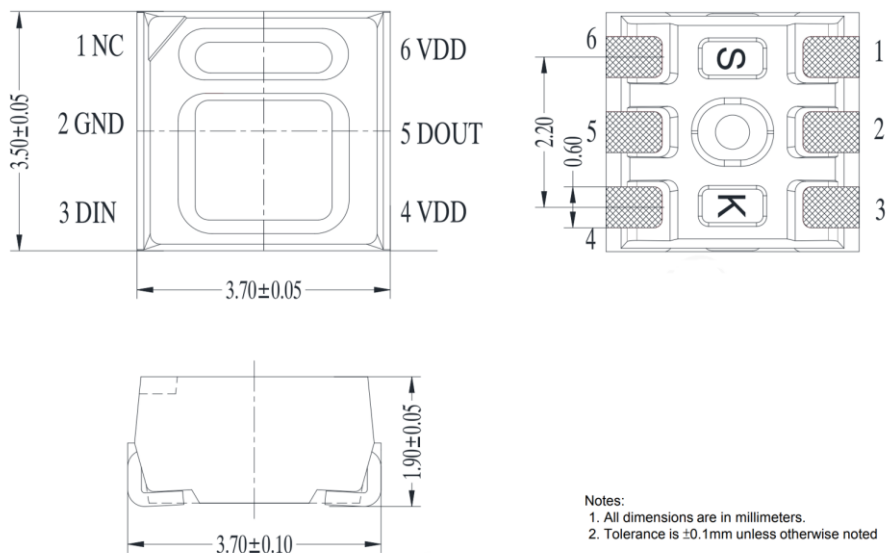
IN-PI33QBTPRPGPBPW-XX Package Outline Dimensions
